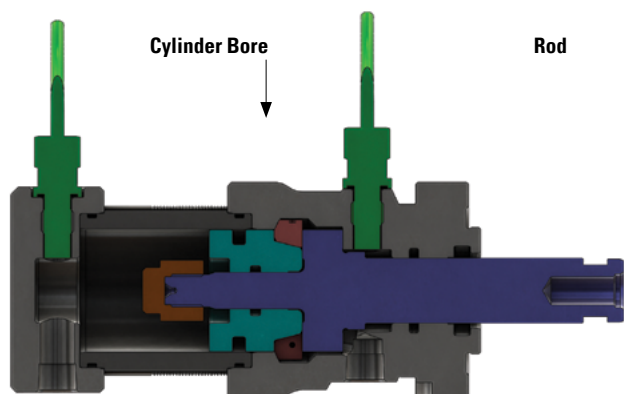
Slide Movement example using the Hydraulic Locking Core Pull Cylinder.
